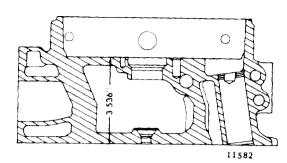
B-32. Minimum Distance Between Top and Bottom of Cylinder Head
